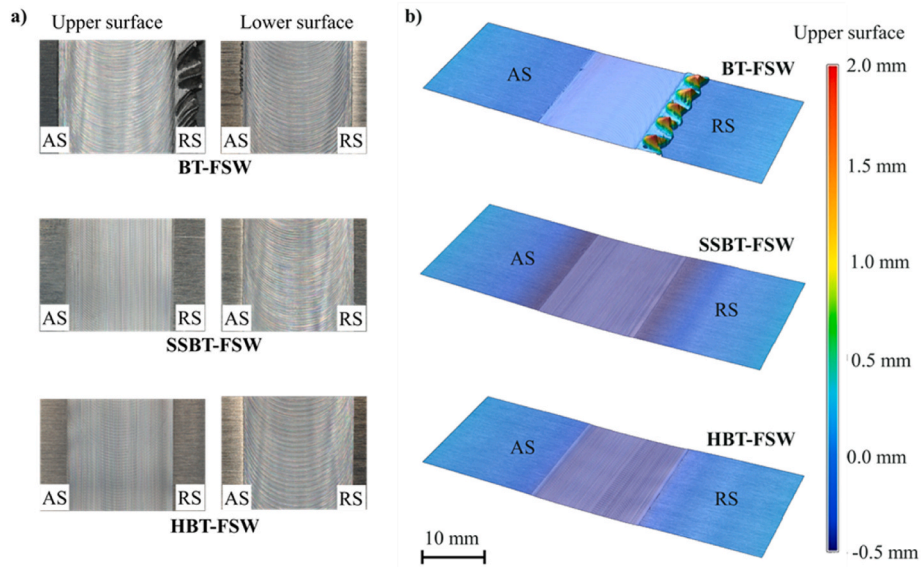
a) Surface appearance of the upper and lower surfaces for the three welding variants. b) Three-dimensional surface topography maps, obtained by profilometry, comparing the upper surfaces. HBT-FSW achieves a smooth, flash-free surface comparable to SSBT-FSW.
